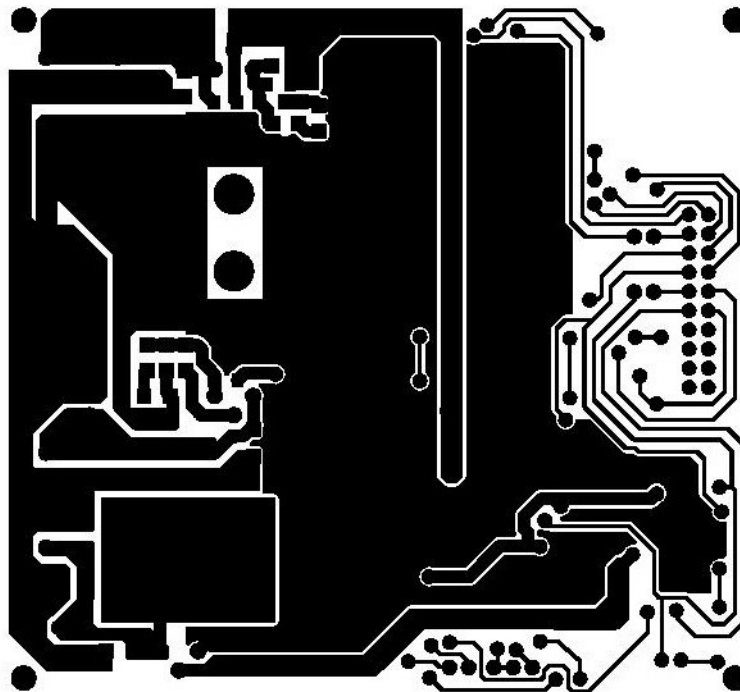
Miniature MOSFET Gate Control Board PCB Mask Bottom
